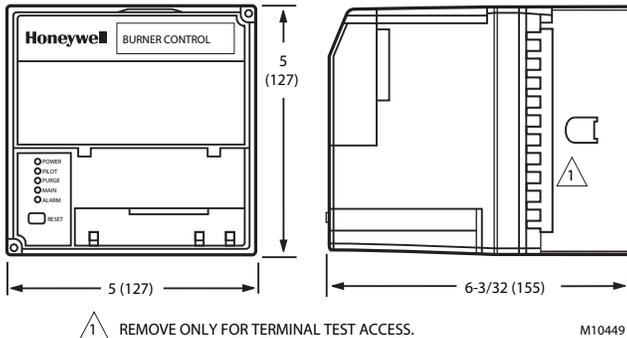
Mounting dimensions of RM7896D Relay Module and Q7800A Subbase in in. (mm).
